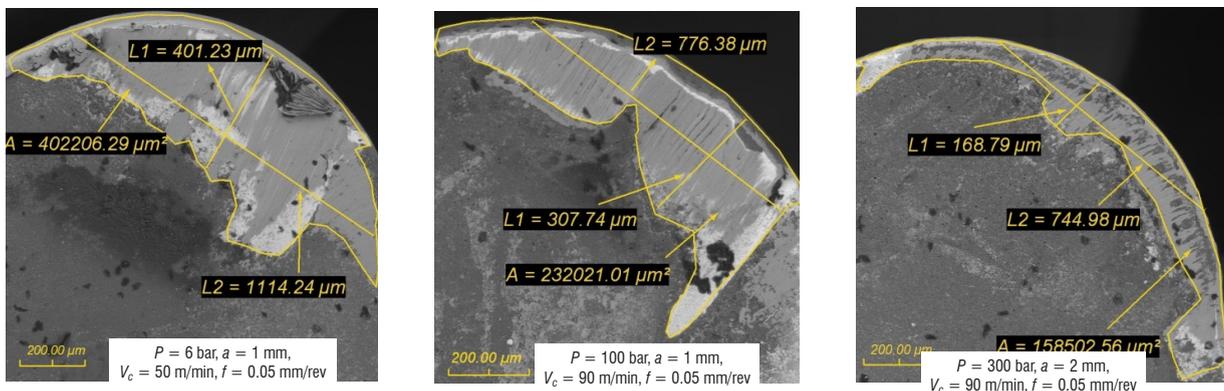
Crater wear on cutting tool at various cutting conditions (volume of material removed is kept constant $V = 57650.4 \text{ mm}^3$)
